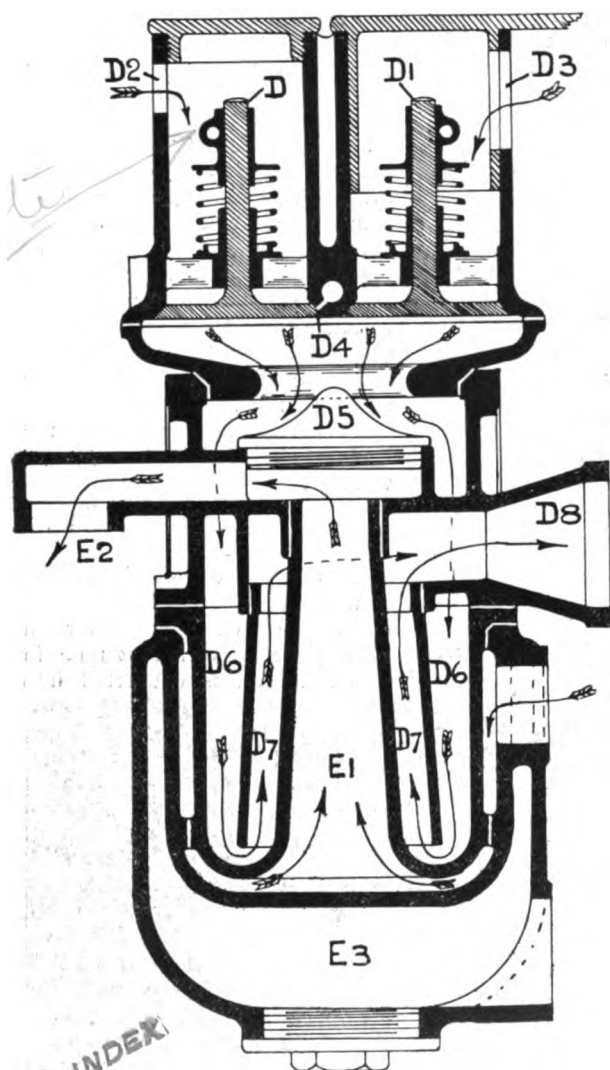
Sectional drawing of the Wolseley Vaporiser, which enables either petrol or ordinary lamp-oil to be used as fuel with their engines.
